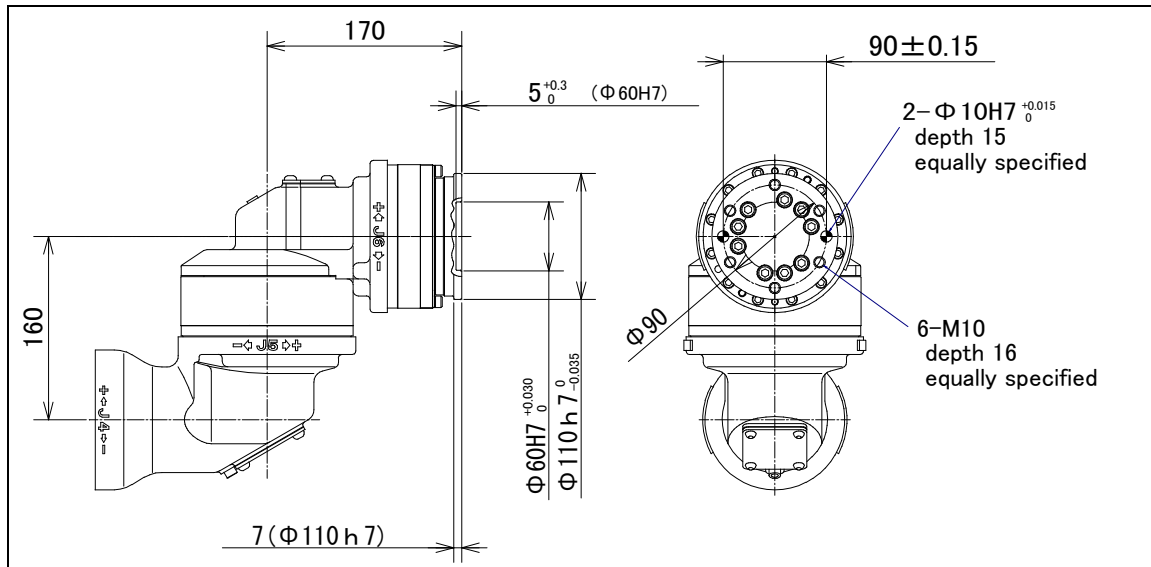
(e) FANUC flange (M-710iC/50E)
